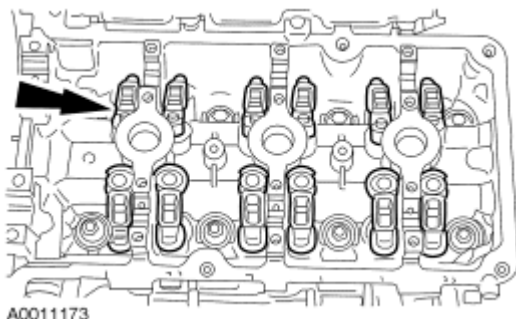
Identifying Loosening Sequence Of Camshaft Bearing Bolts - Late Build Vehicles
